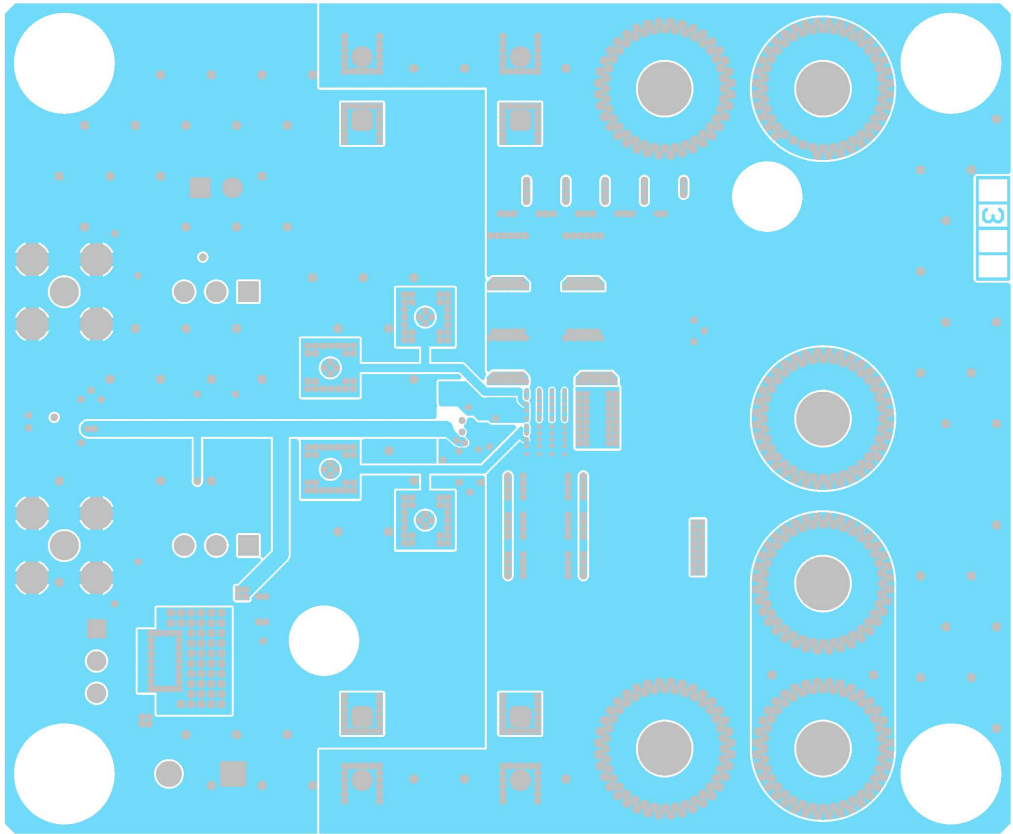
NX-HB-GAN3R2-BSC PCB inner layer 2
